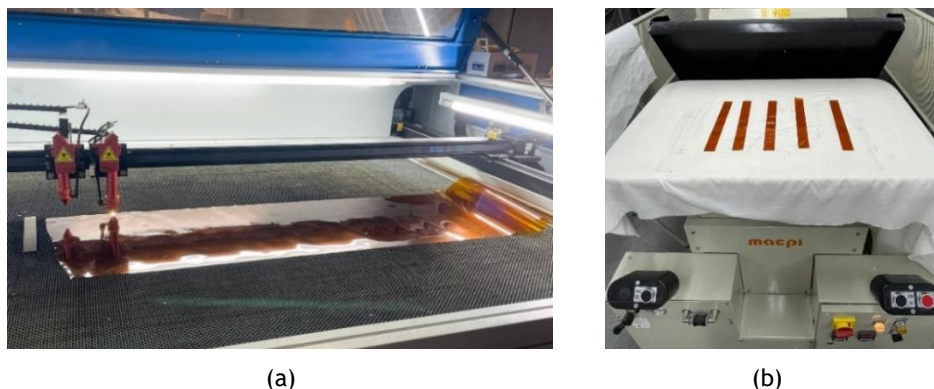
Bonding construction method: (a) laser cutting machine and (b) pressing machine.
